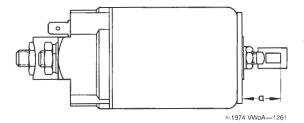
Pull rod adjustment. Loosen locknut, then turn rod clockwise or counterclockwise until dimension a is 19 mm ± 0.10 (.748 ± .004 in.). Tighten locknut and recheck dimension a.
